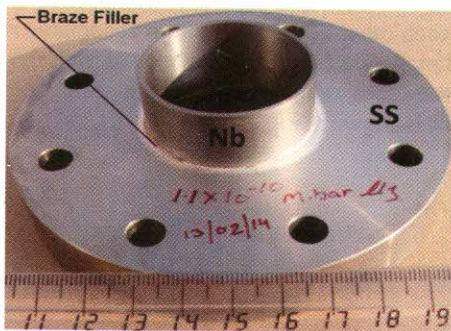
Vacuum brazed Nb-SS assembly
